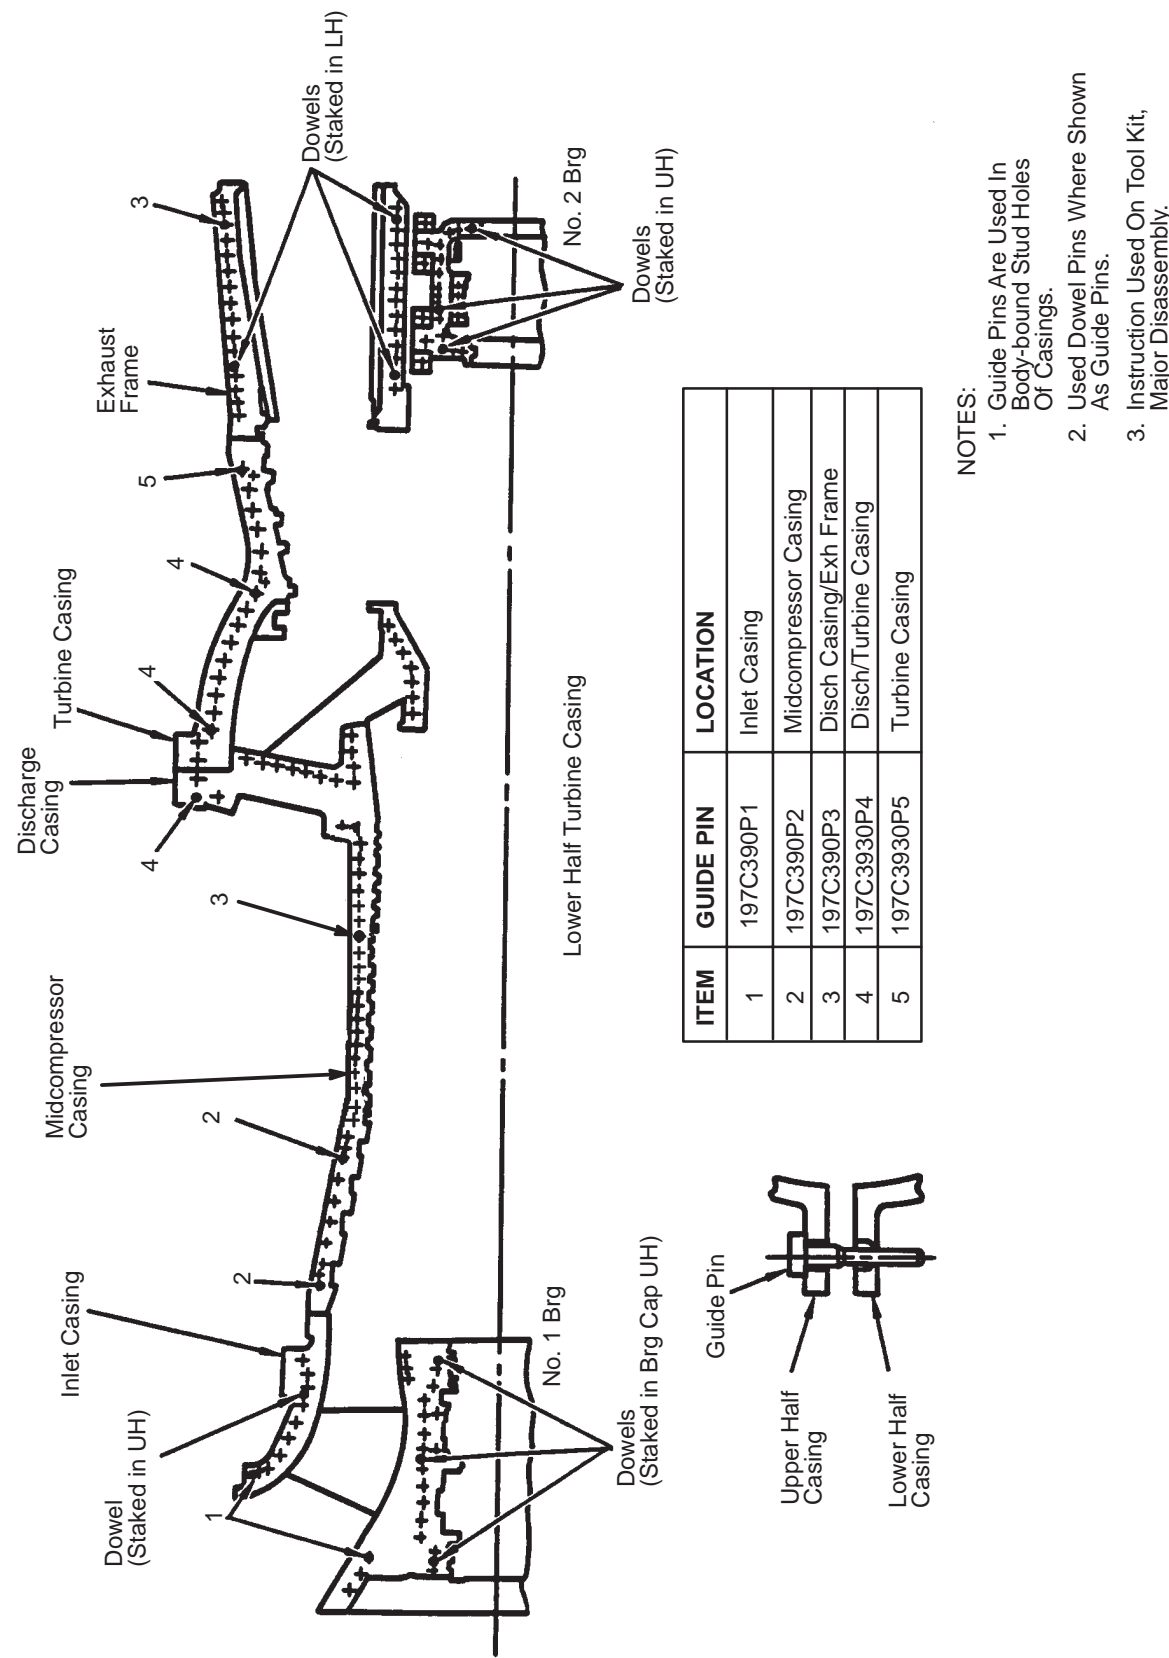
Body-bound Bolt Guide Pin Locations.
